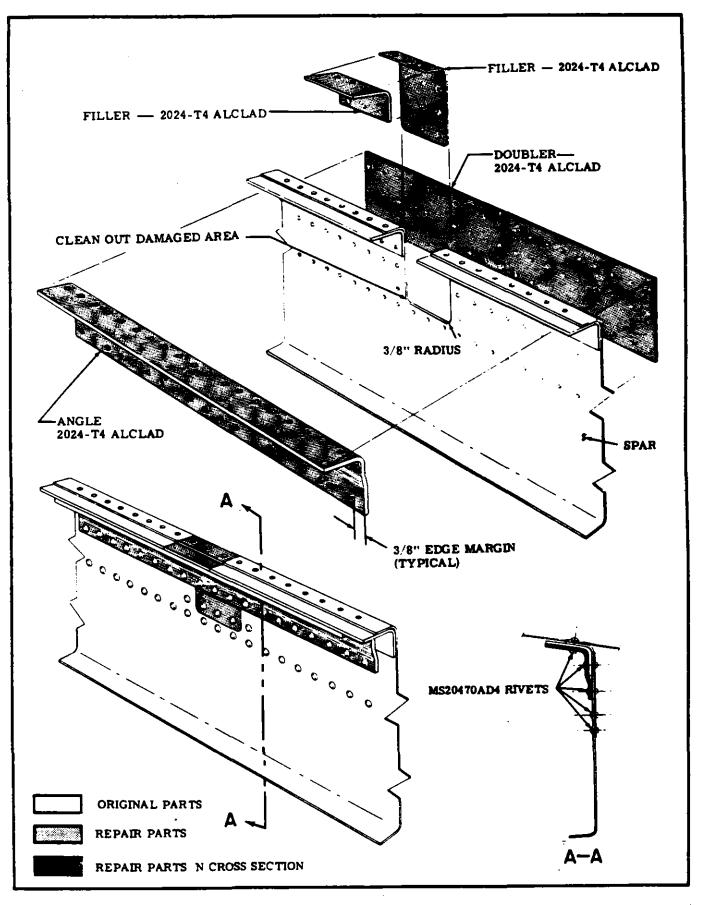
Wing Spar Repair (Sheet 1 of 4)
